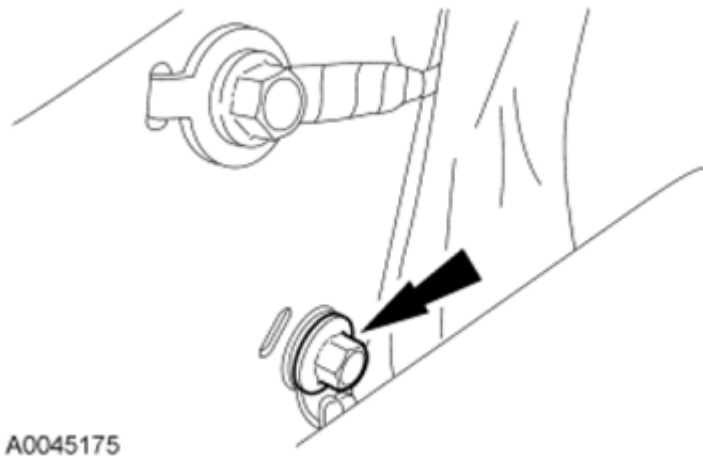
Locating Generator Battery Cable Pin-Type Retainer
